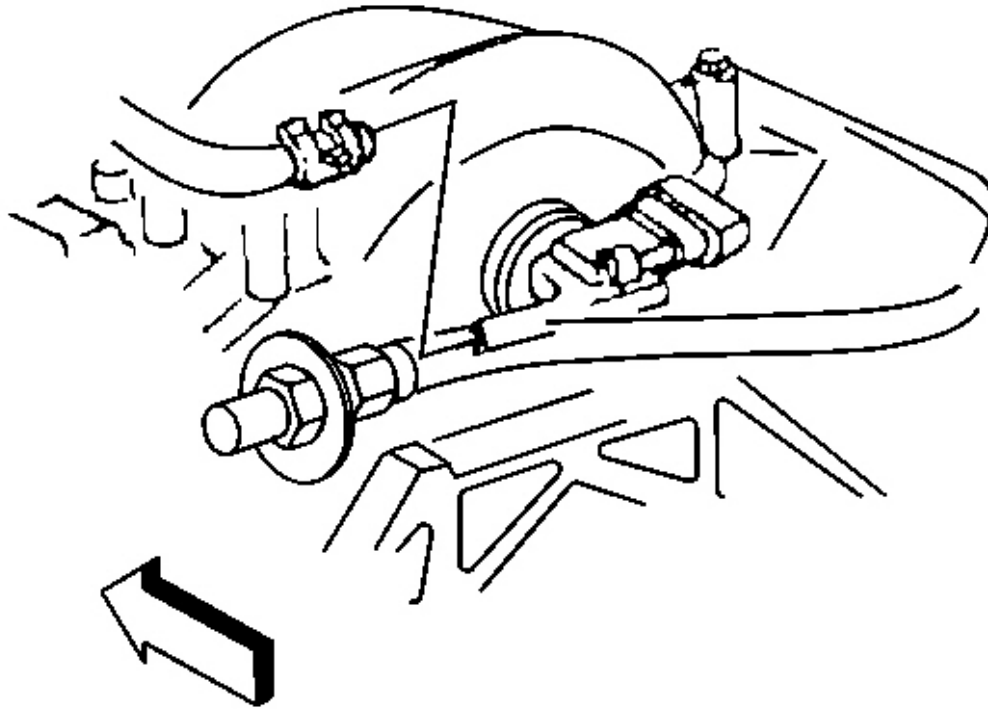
Brake Booster Vacuum Hose To Intake Manifold
